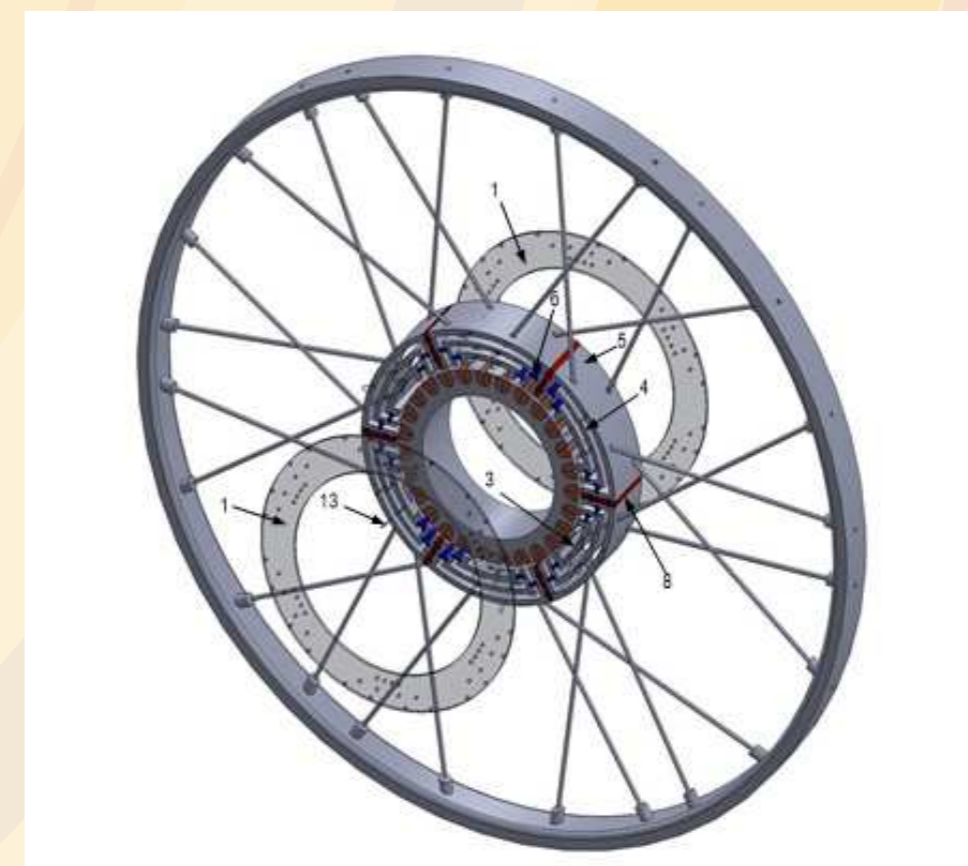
Spatial view of a bike wheel with the electric machine incorporated
